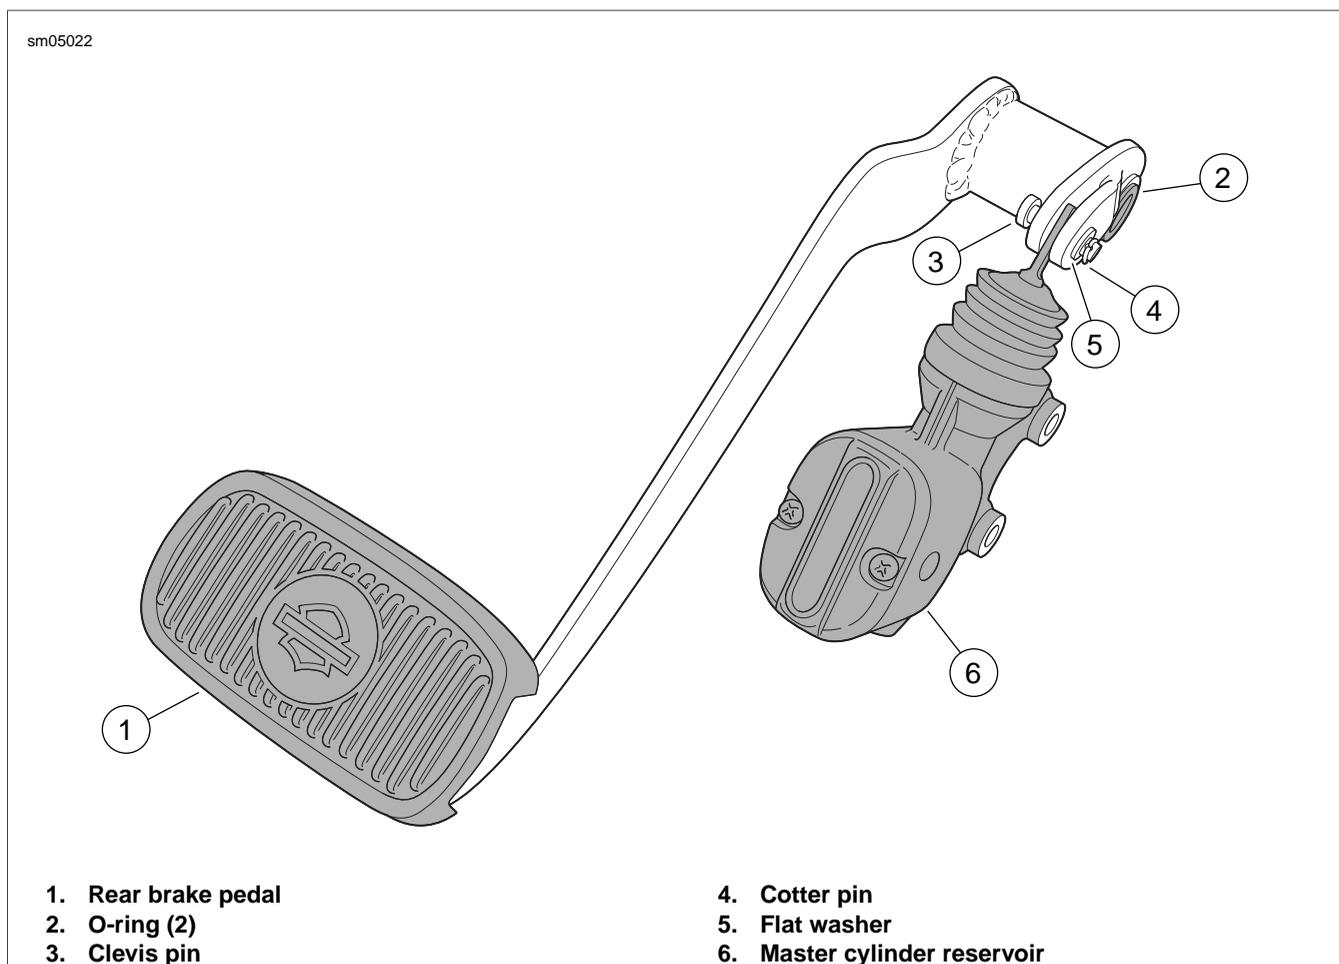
Rear Master Cylinder/Brake Pedal Assembly
